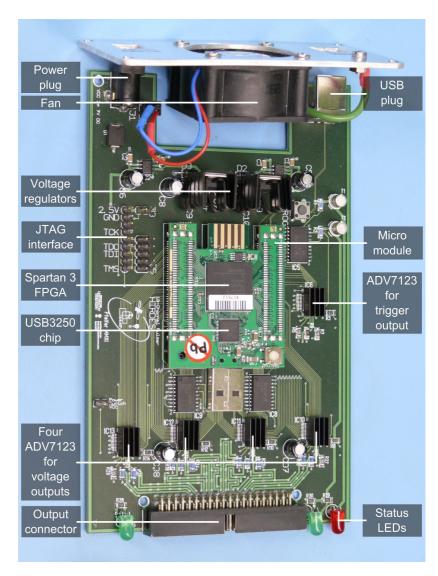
The $160\,\mathrm{mm}$ by $100\,\mathrm{mm}$ charge injector assembly.
